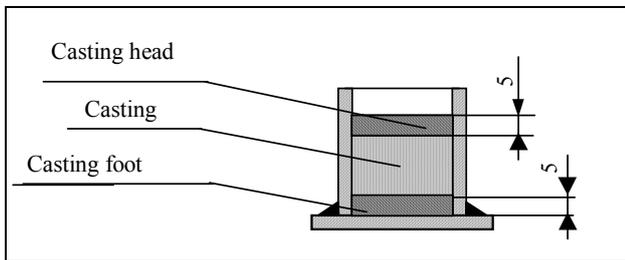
Draft of mould with casting steel pipe with welded bottom side of MMC
